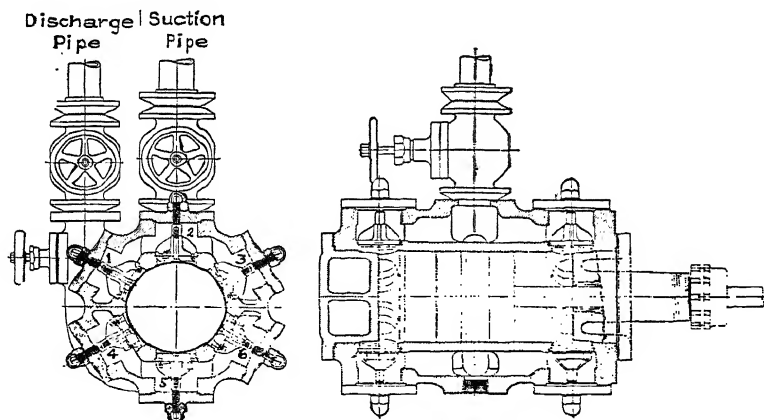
Cross-sections of high-speed ammonia compressor with ring-plate valves.
